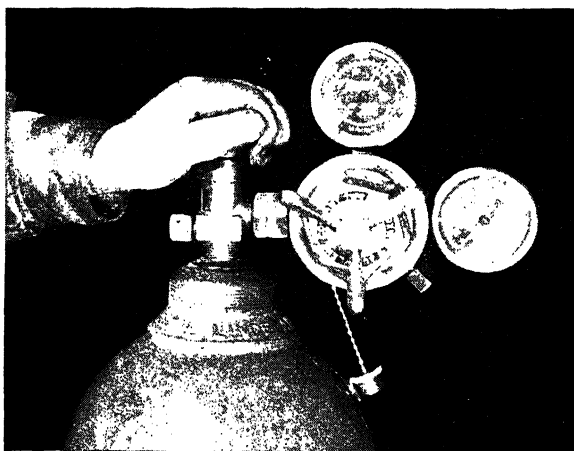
Turning on oxygen cylinder. (*Courtesy of Linde Air Products Co.*)
